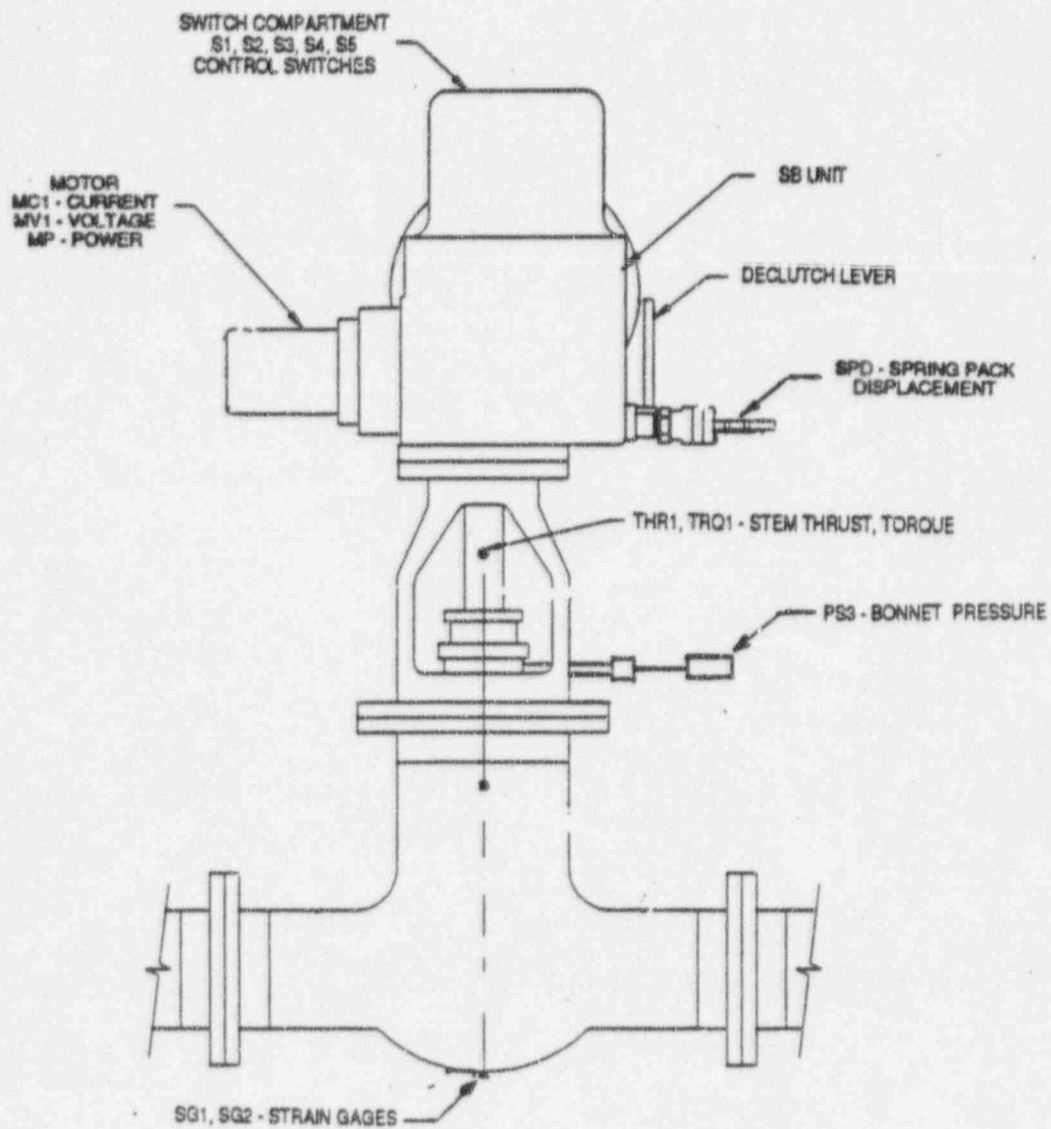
TEST SPECIMEN, MOV INSTRUMENTATION
